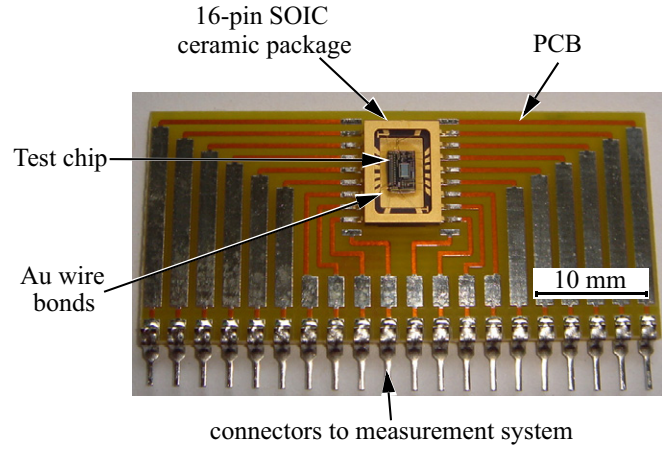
Microsensor test chip in package. Au wire bonds connecting to package terminals.
